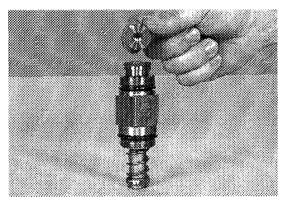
Apply Loctite nr. 243 to thread of inching actuator rod, install inching upper piston.
